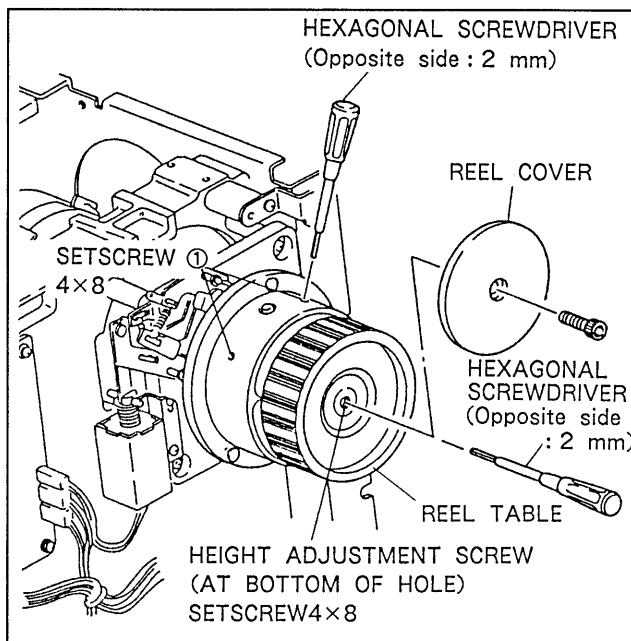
Take-up Reel Table Height Adjustment
